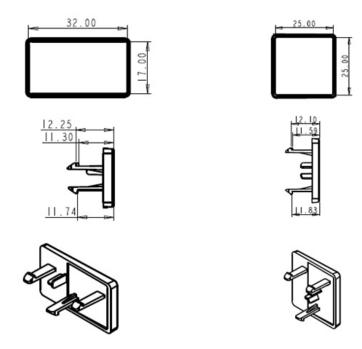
Front Bezel accessory ID Badge mechanical drawings
